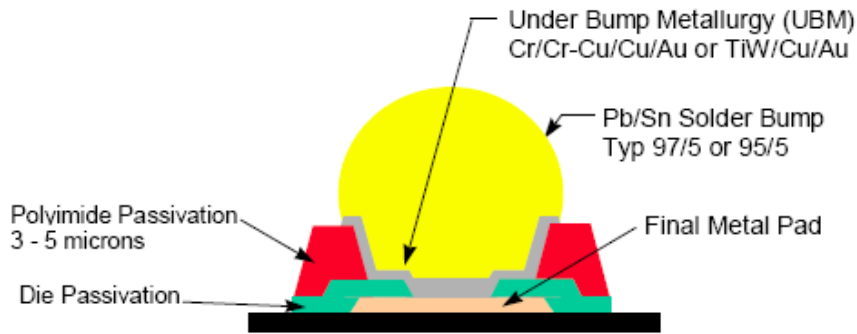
Schematic cross-section of evaporated UBM and solder bump [12]
